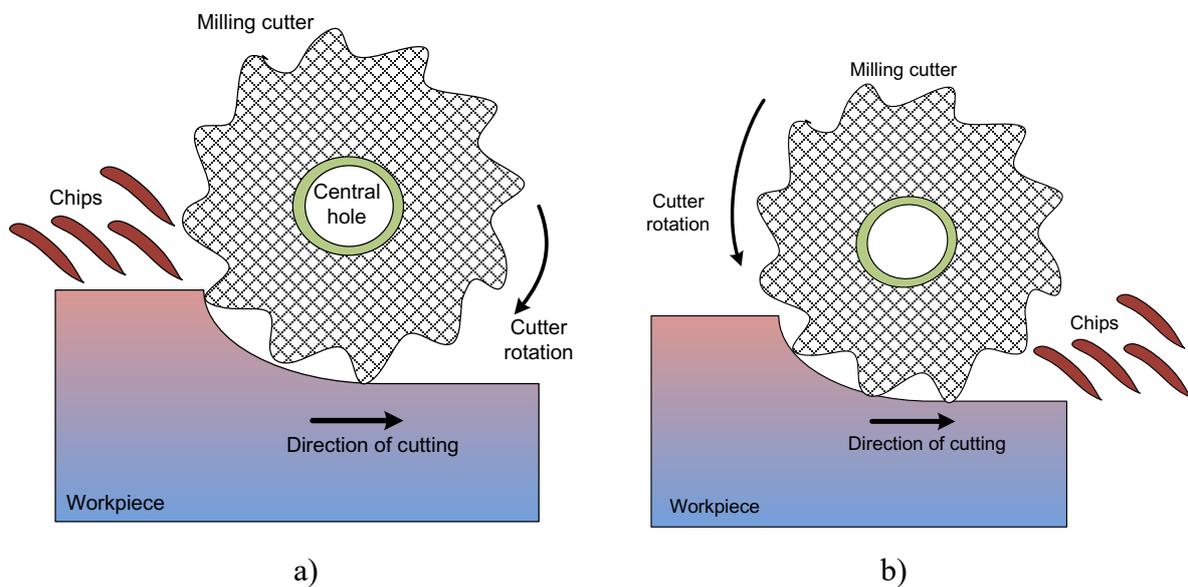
Schematic diagram showing a) up milling and b) down milling.
